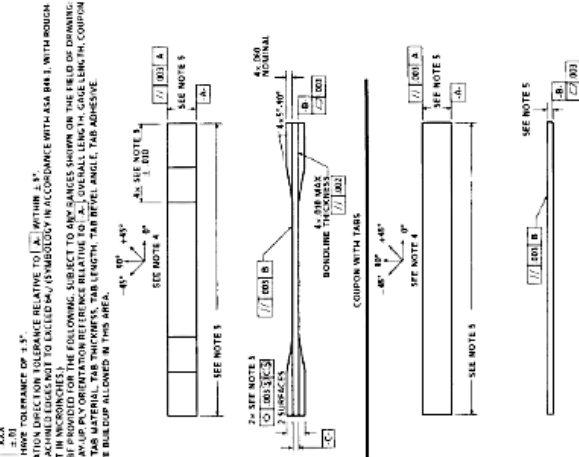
Tension Test Specimen Drawing (inch-pound)
